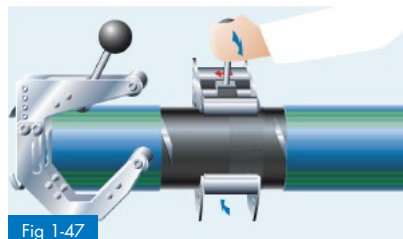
Removal of the oxide layer using a suitable peeling device
